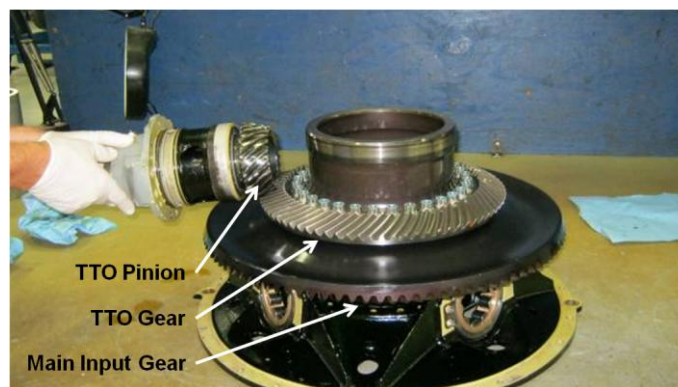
Disassembled input spiral bevel and TTO spiral bevel gears as well as the TTO pinion.
